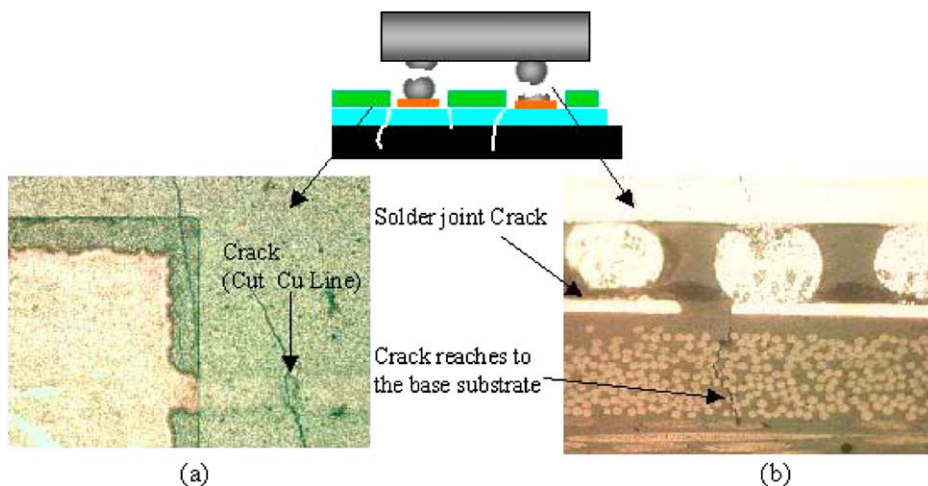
Failure analysis of flip chip assembly on low-CTE carbon-epoxy boards.
